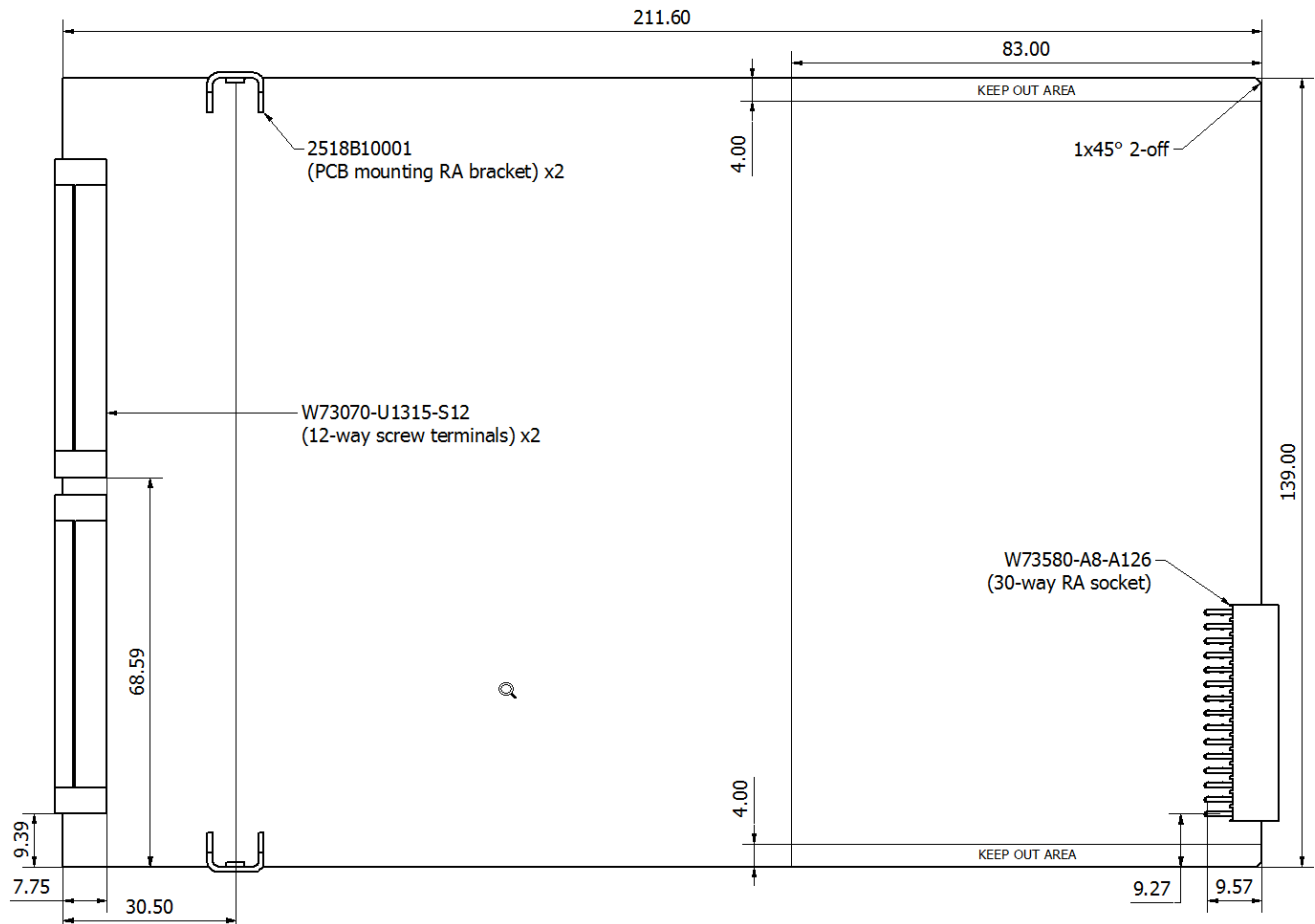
PCB Size and connector placement for AUX (RTD Variant)
